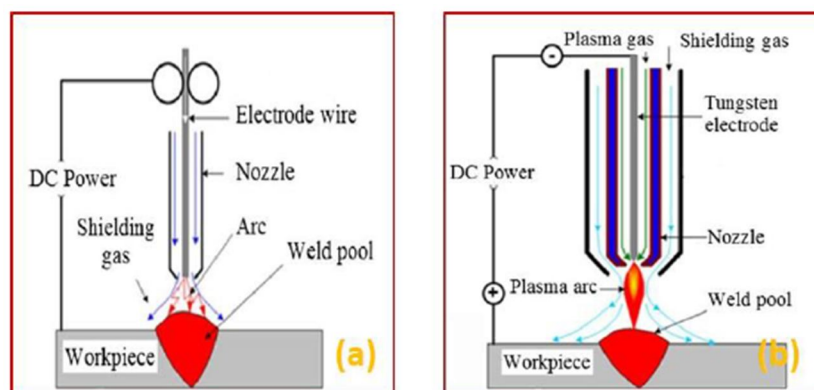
Schematic diagram of MIG Welding, and (b) Plasma Arc Welding Process [16].
